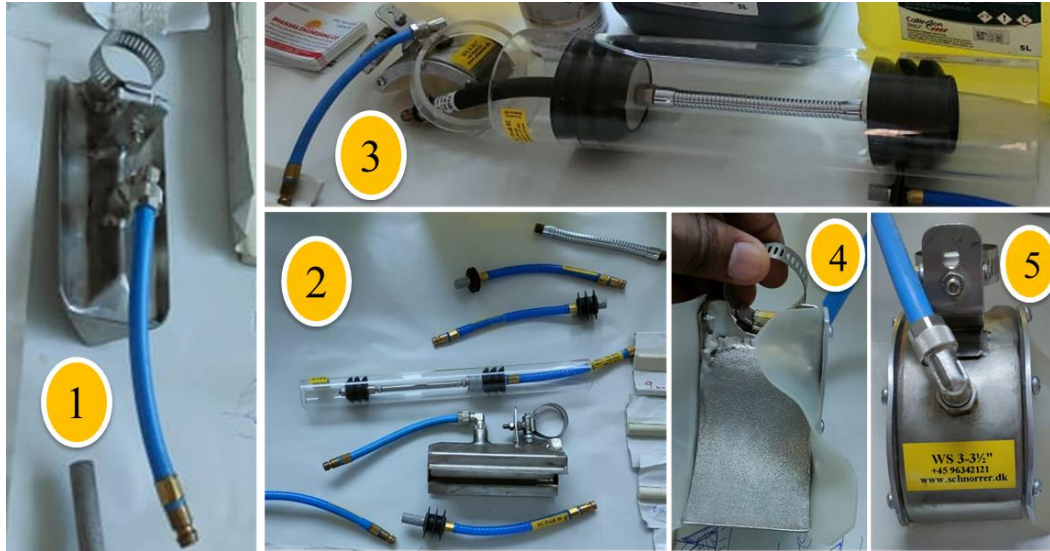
Commercially available shielding arrangements: (1, 2) trailing shield; (3) vacuum chamber for pipe weld; (4, 5) bottom and top of trailing shield [70]
